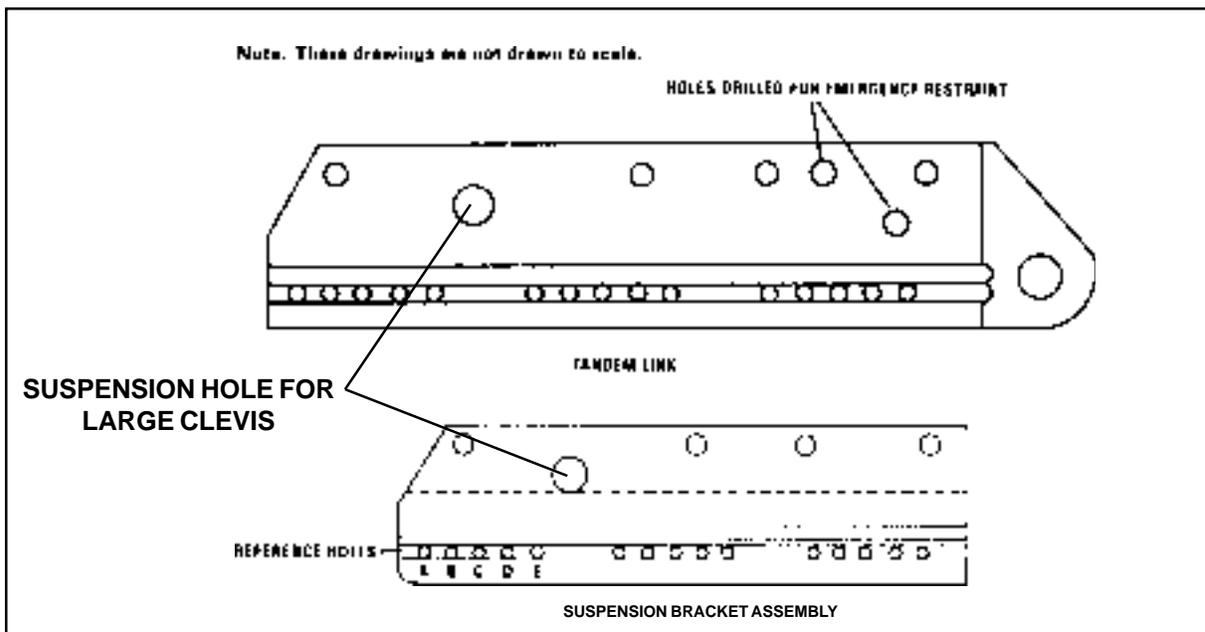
Tandem Link and Suspension Bracket Assembly
